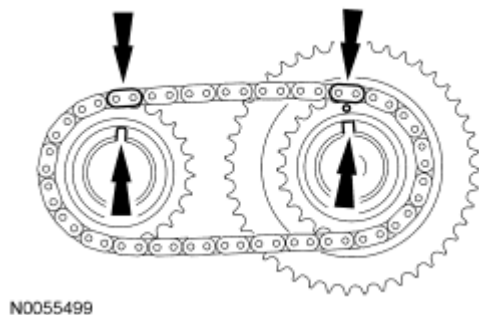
Aligning LH Exhaust Camshaft Sprocket & LH Secondary Timing Chain Colored Links With Timing Marks
